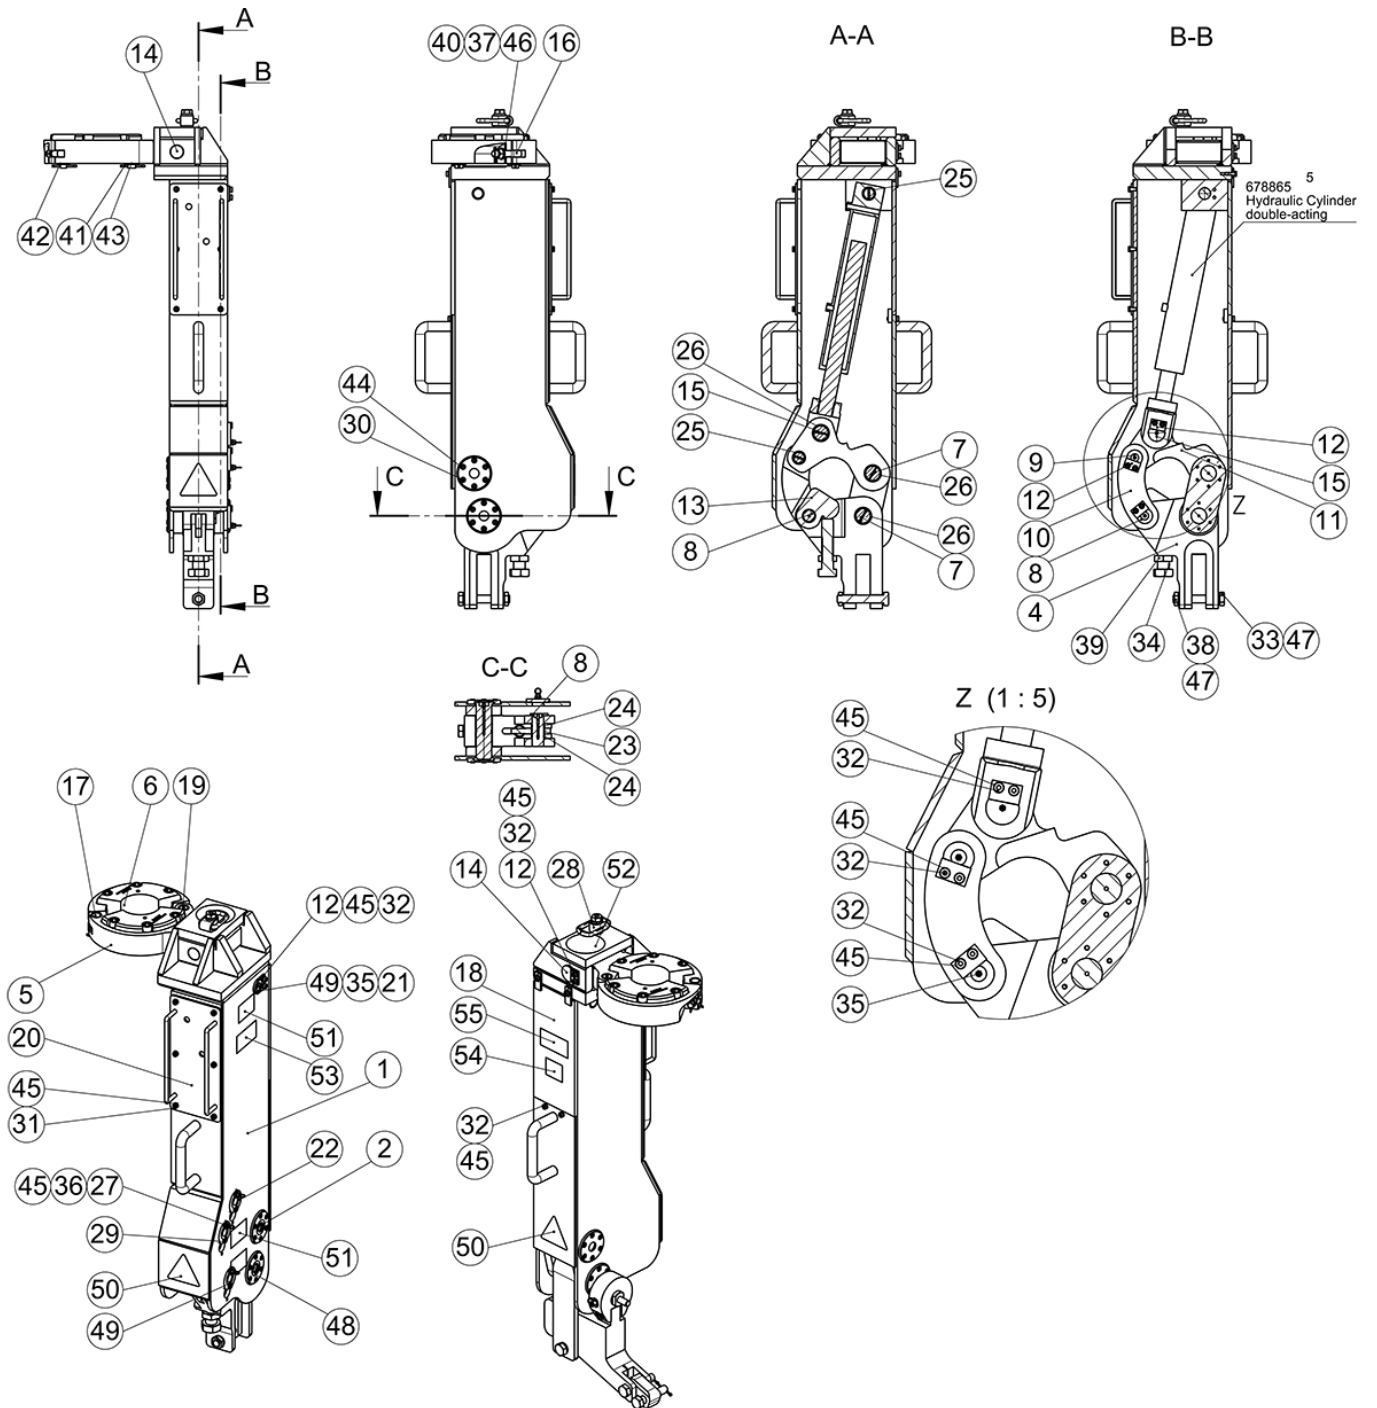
678800 Single Elevator Rotation System Drawing I
